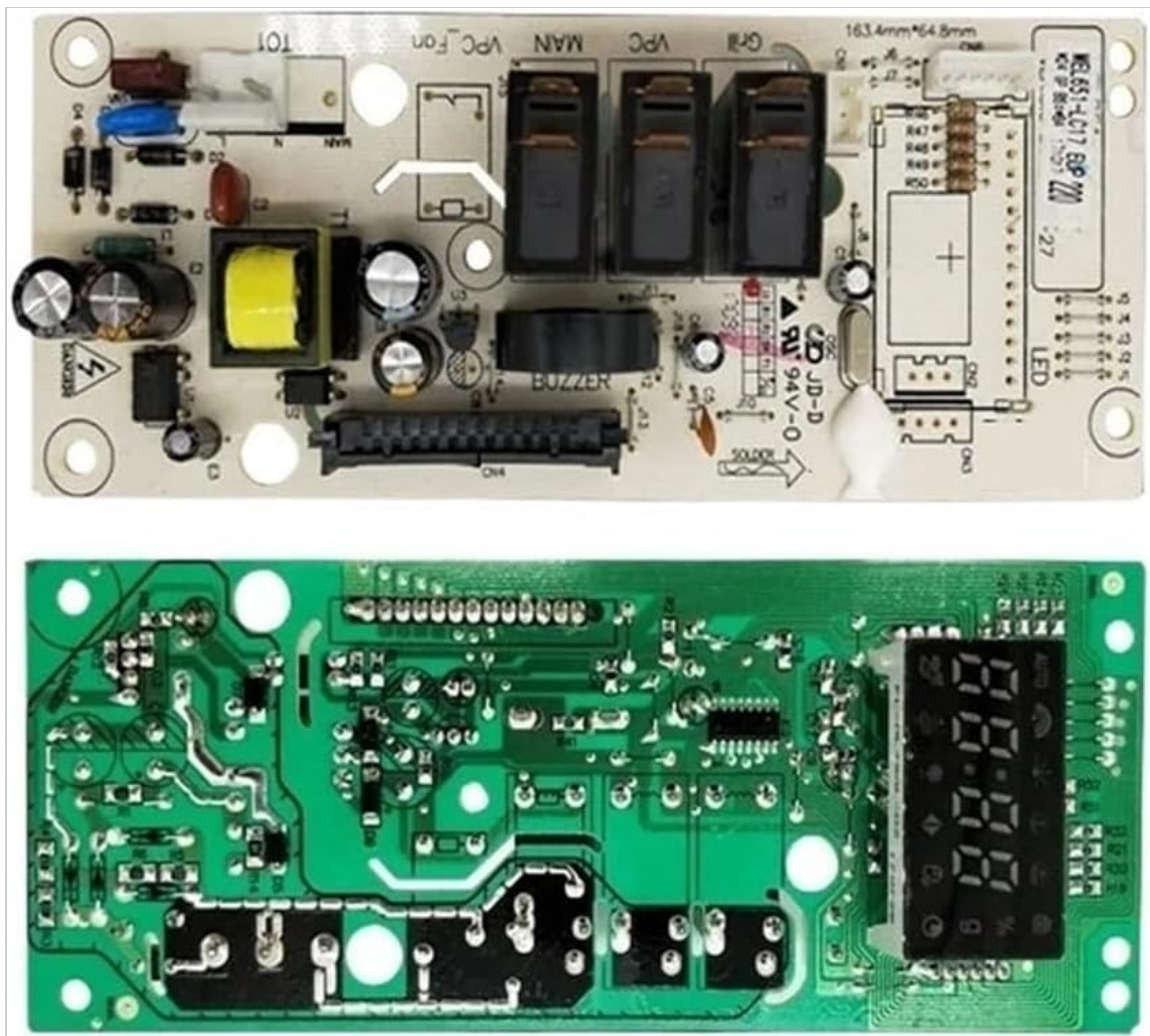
An alternative view of both the green control board and the white power board, illustrating their distinct layouts and the arrangement of their respective components. This perspective can aid in understanding the overall assembly.
